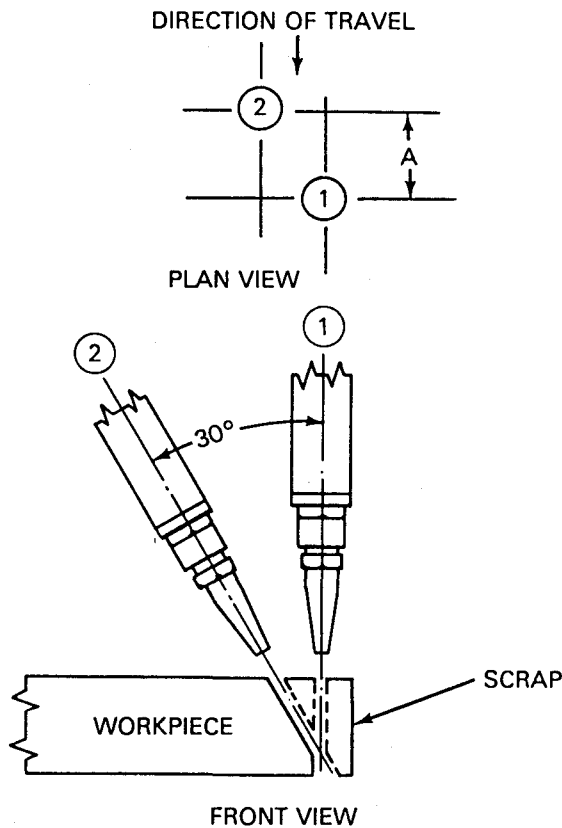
Cutting a Single Bevel Edge Preparation With a Root Face
